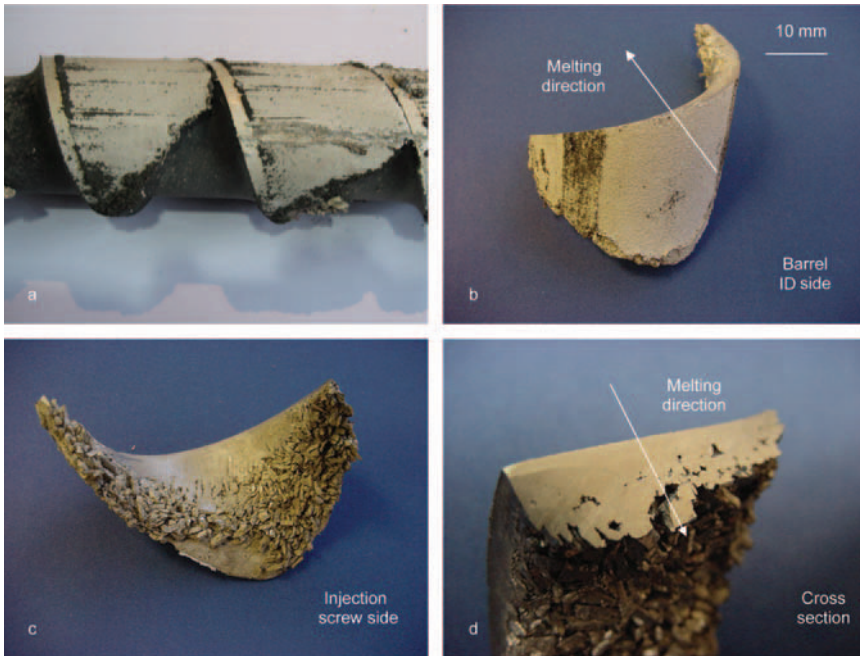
The melting mechanism of magnesium alloys inside the machine barrel: a partially melted feedstock on the screw; b alloy removed from the screw showing the melting progress from the barrel walls; c screw side showing still not melted chips; d cross section through the alloy removed showing a progress of melting
